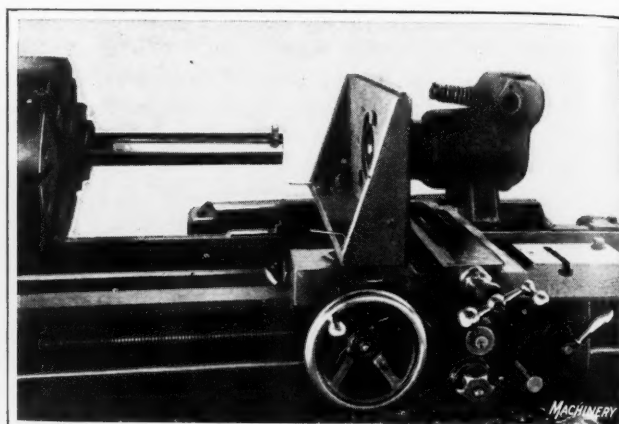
Lathe Set-up for reboring a Tractor Cylinder
